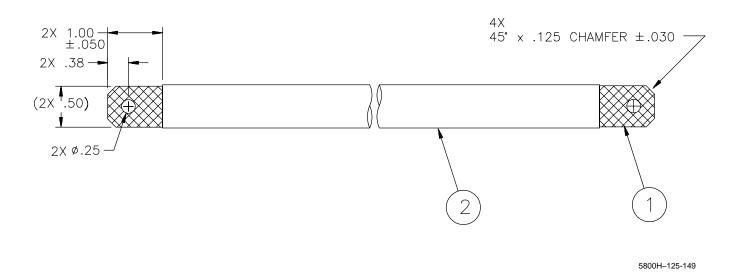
Ground Strap Cable Assembly (10400-1136)
